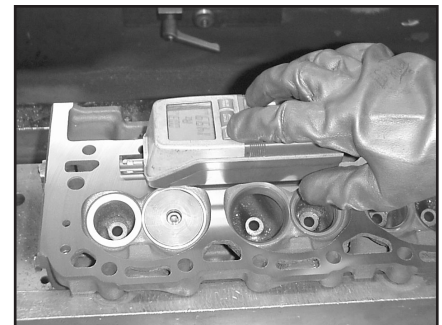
A profilometer is used to measure and calculate the surface texture of blocks and cylinder heads.
